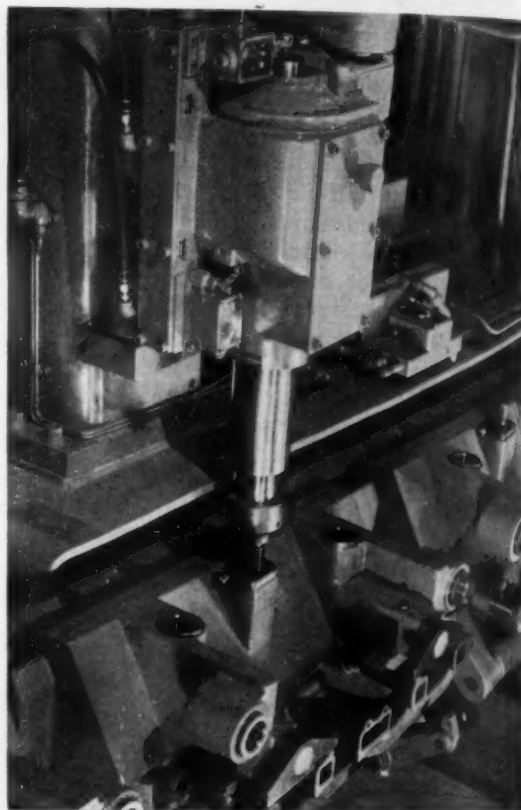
Hydraulic power wrench has been standardized to operate the clamps for the work holding devices.
